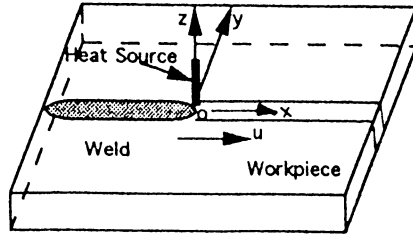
Two-Dimensional Model of Arc Welding
